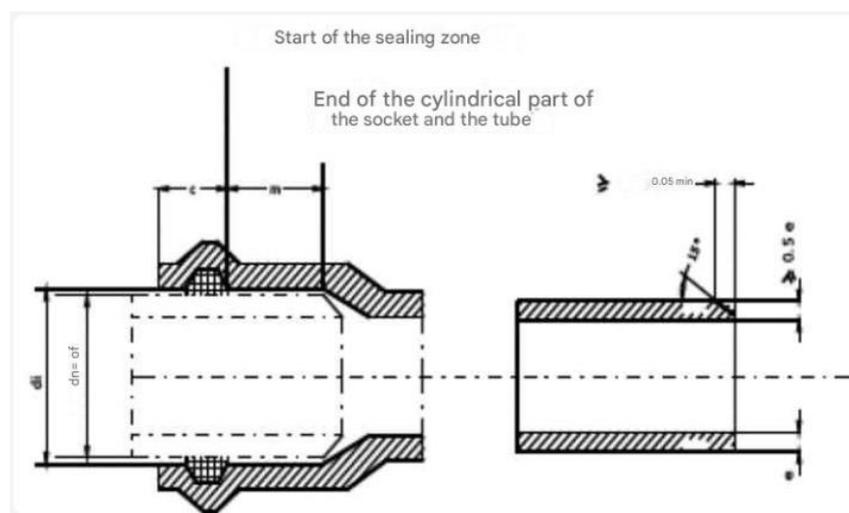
Socketing of Tubes for Seal Ring Type Joints
